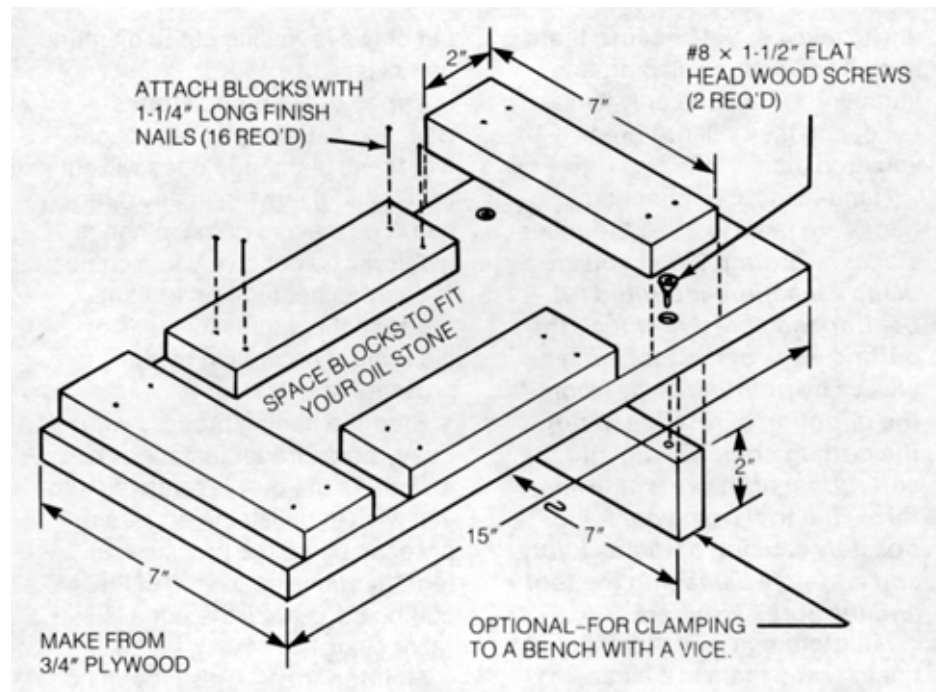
Construction details of an oil stone holding fixture that clamps to a bench.
